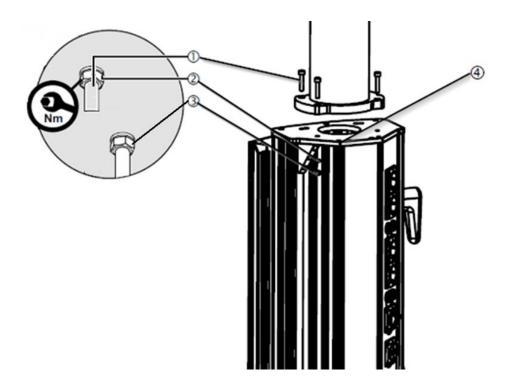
Disassembly / assembly of the service head on the drop tube.
